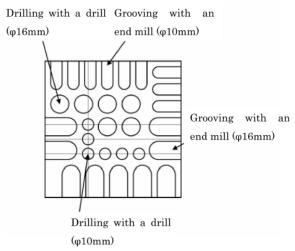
Test workpiece introduced by JIS TS B 0024-1 [59].
